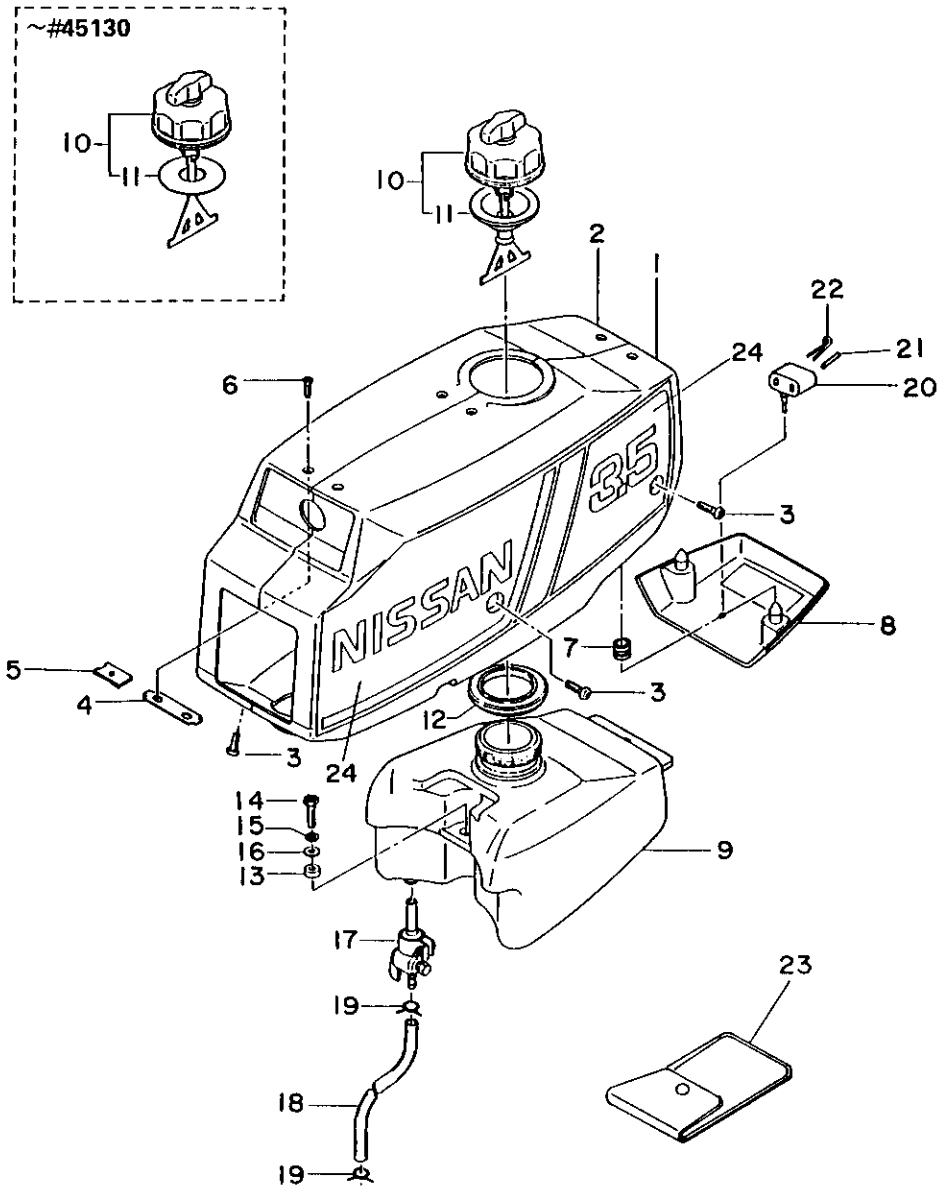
MOTOR COVER & INTEGRAL FUEL TANK
